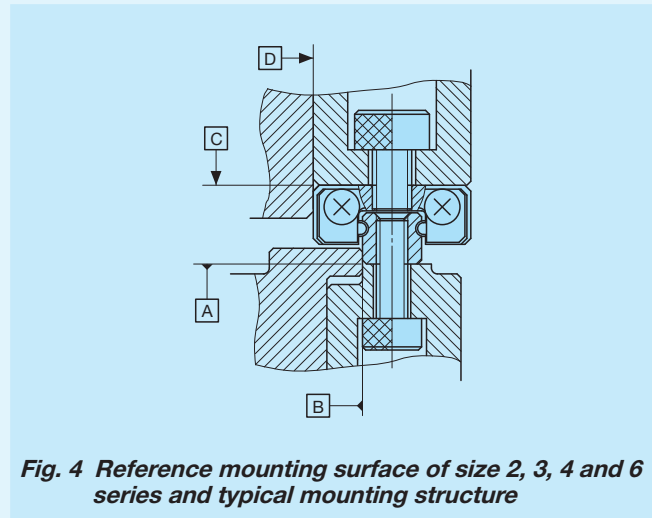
Reference mounting surface of size 2, 3, 4 and 6 series and typical mounting structure
